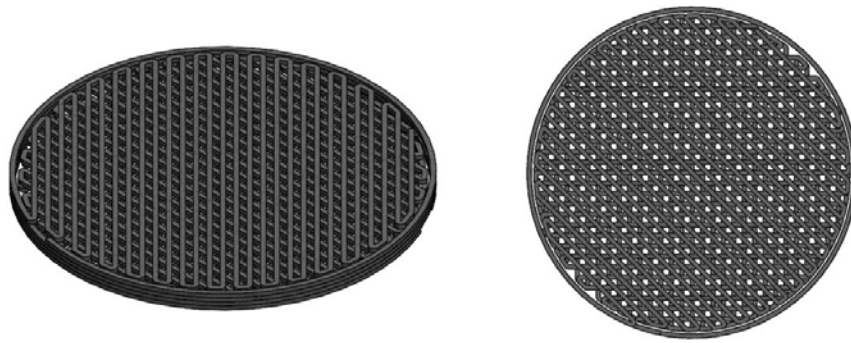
SOLIDWORKS® 3D model of the 45° pattern.
